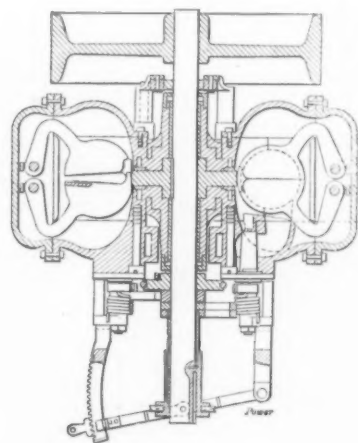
SECTIONAL VIEW OF ENGLUND ROTARY ENGINE.
